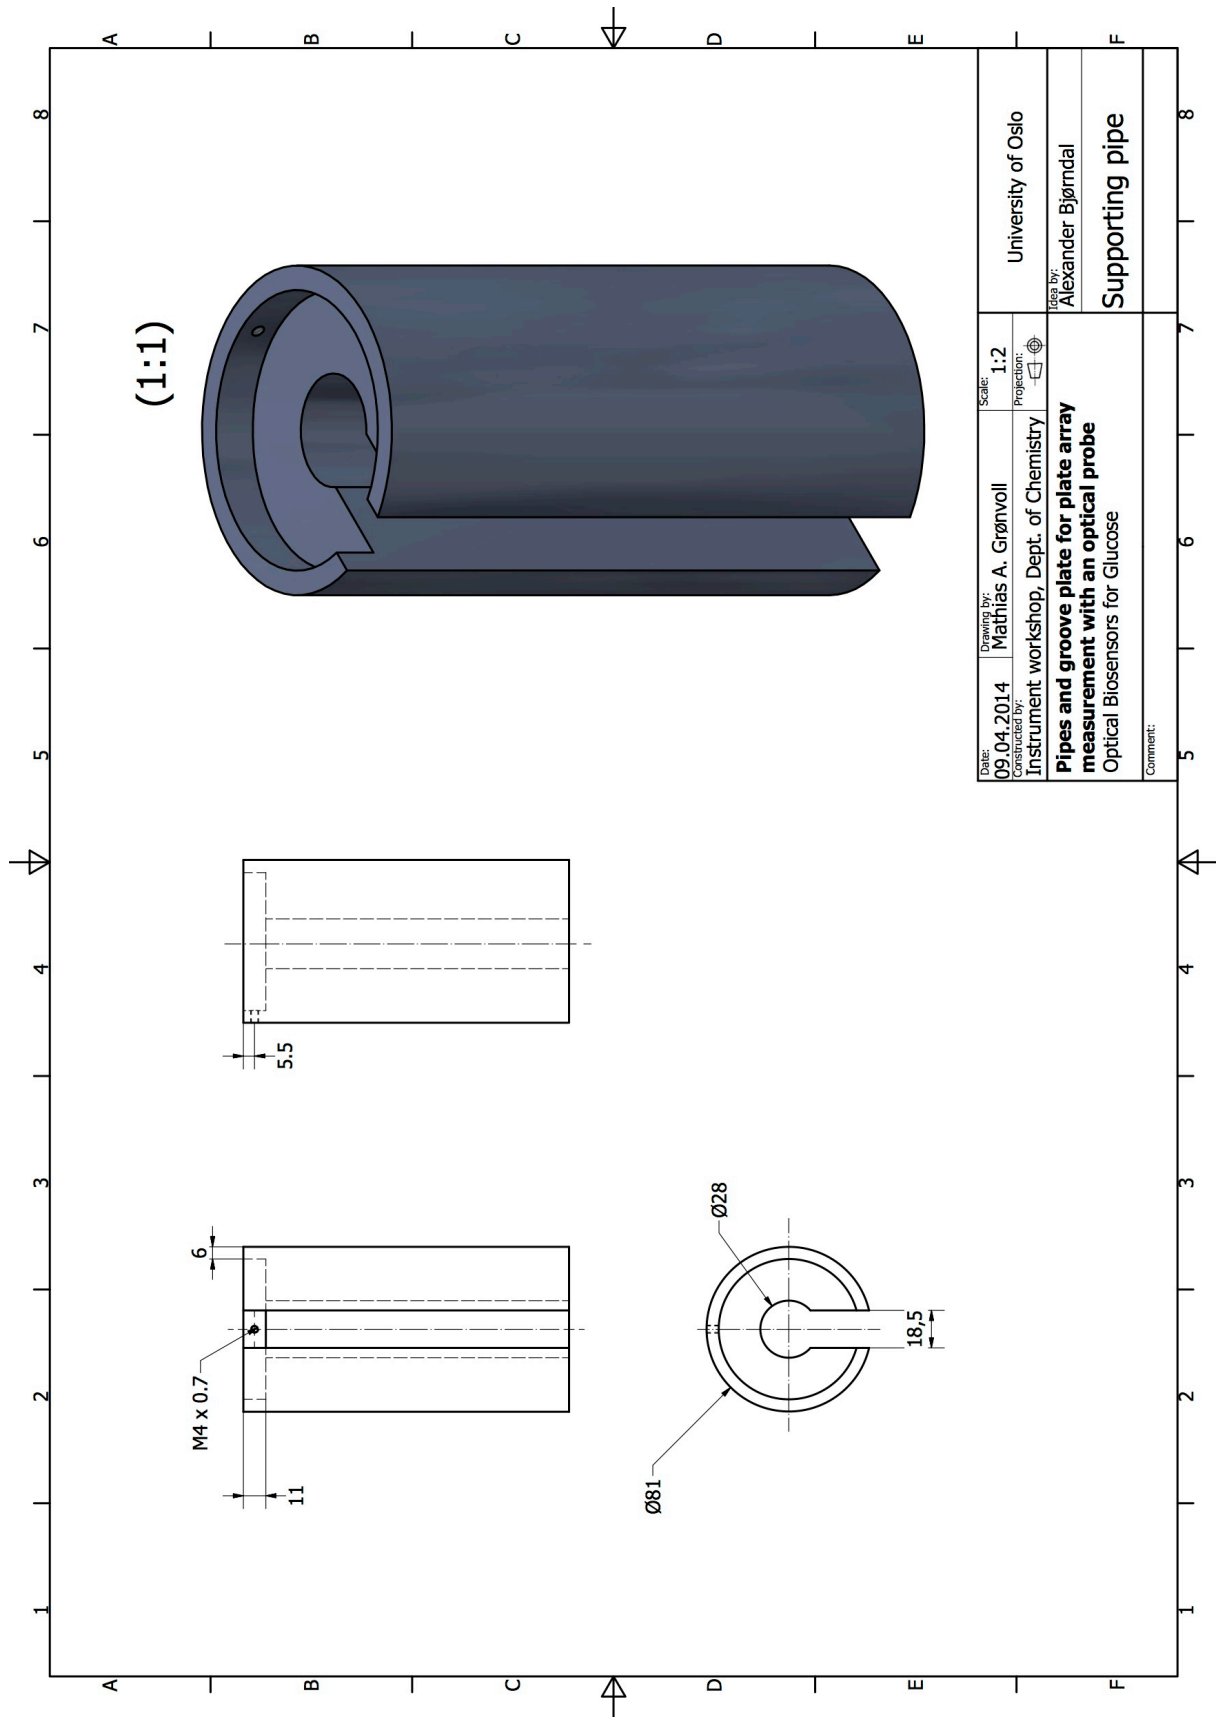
Supporting pipe used in the setup for plate array measurement with groove plate and pipes.
